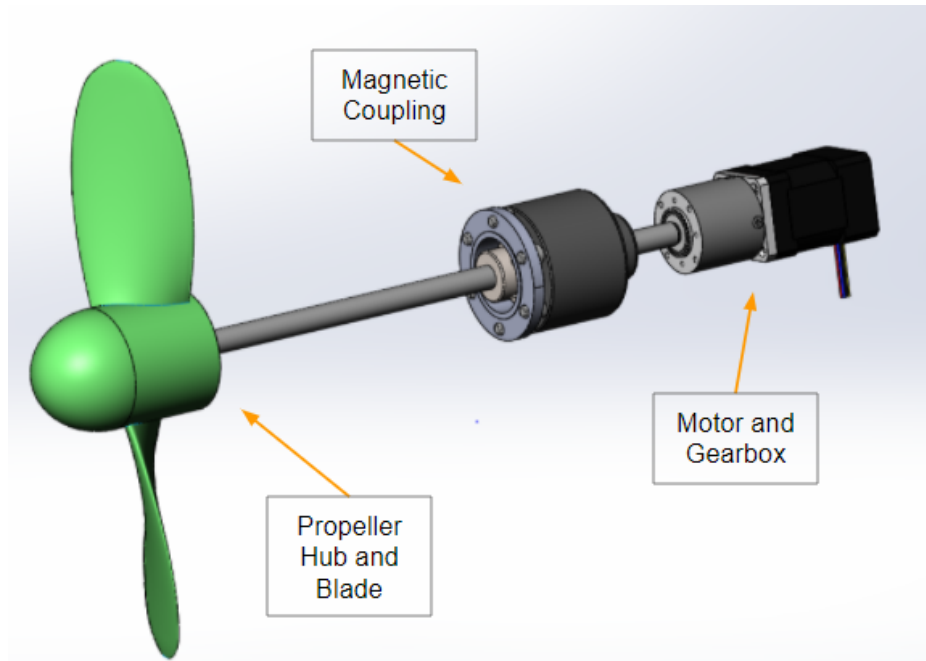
Propeller System Configuration. The propeller hub and blades, magnetic coupling, and motor-gearbox assembly pictured from left to right.
